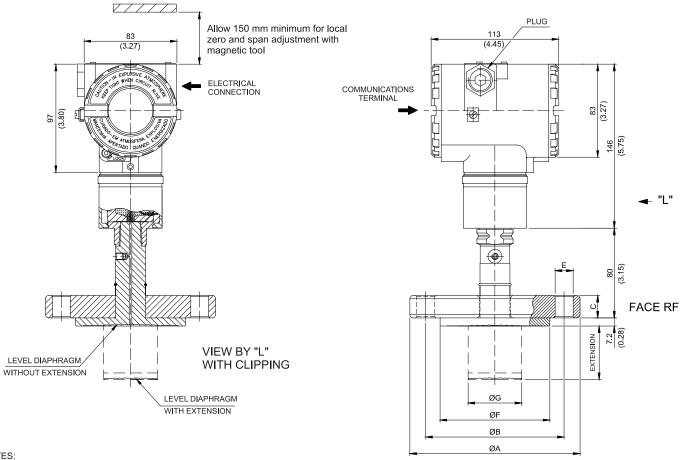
(b) - Dimensional Drawing and Mounting Position for LD290 - Sanitary
